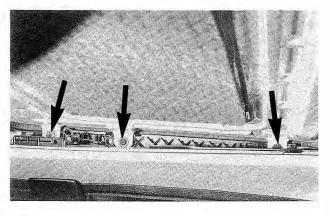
Sunroof left-side mounting screws (arrows). Remove screws from both right and left sides.
